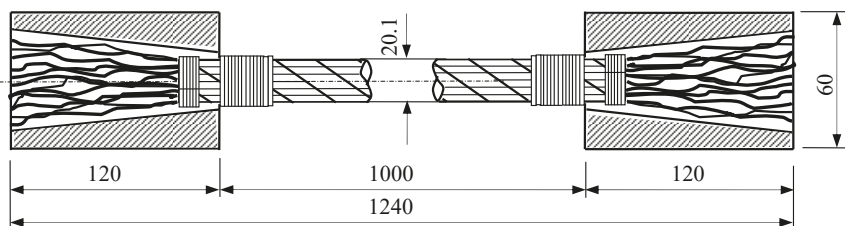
Dimensions of a rope sample with conical bush [mm]
